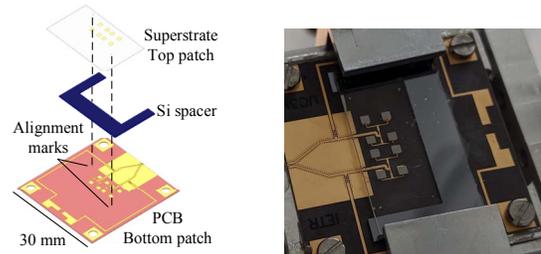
Left: Stack of antenna layers with the bottom patches printed on the PCB and the top ones printed on a quartz superstrate. Right: assembled prototype.
